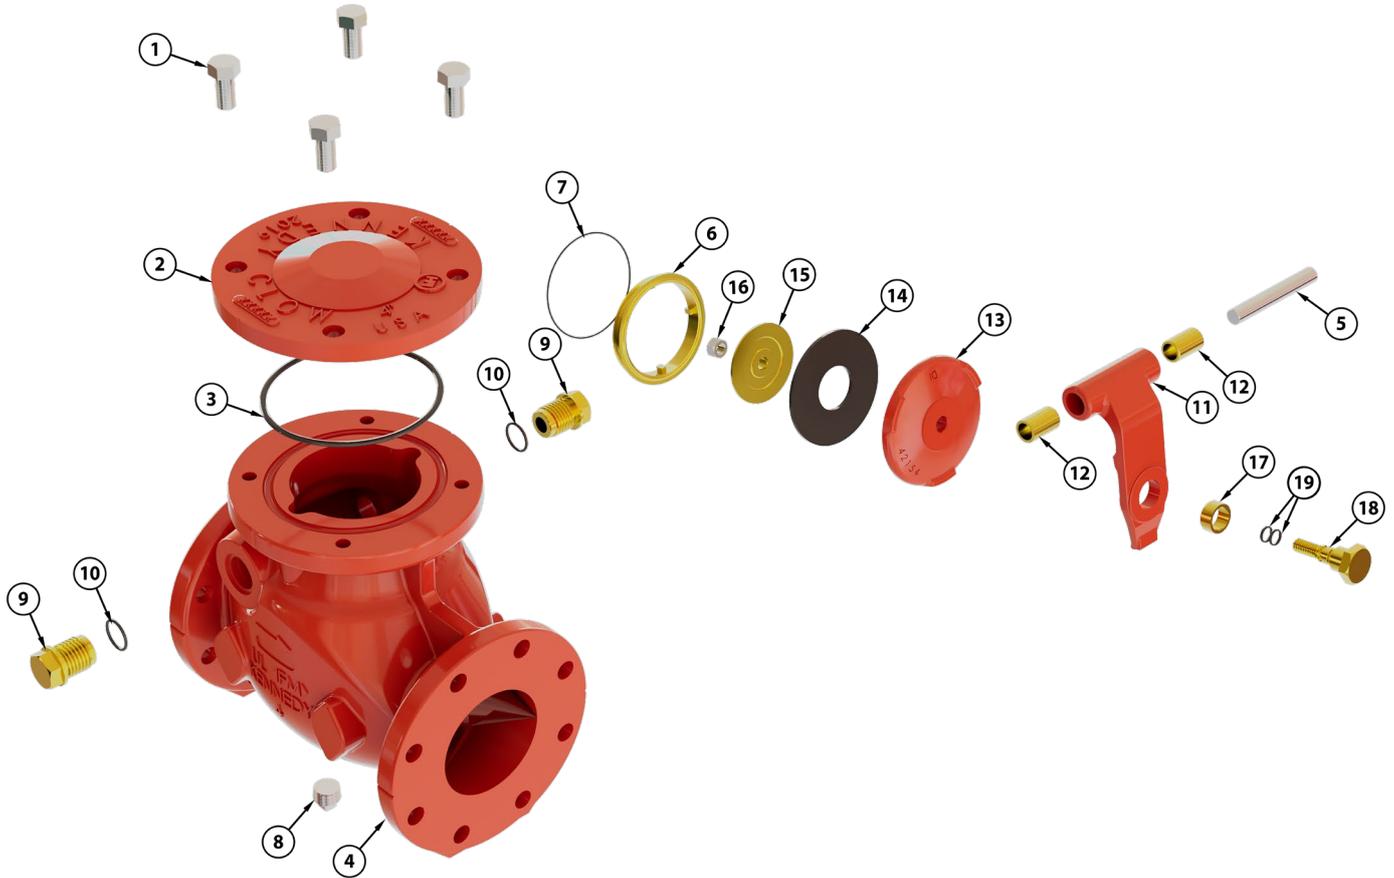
A Rubber Face Disc Assembly: 4" - 12"
